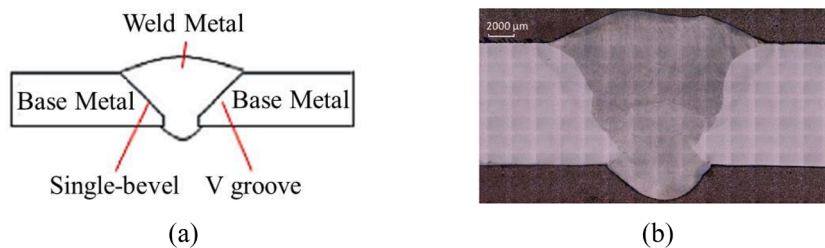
(a) The schematic drawing of the cross-section. (b) The etched cross-section of S500MH welded connection (10 mm).
